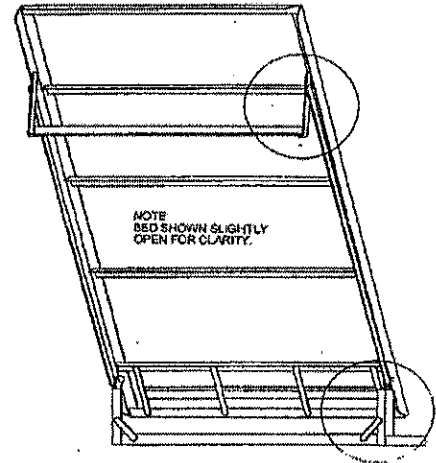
Illustration of bed frame assembly attached to base angle floor base assembly.
